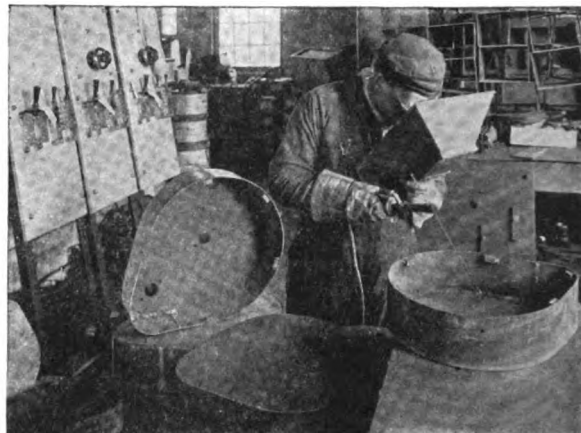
Welding steel sheets together to form gear cases. The lugs on the inside of the case are also welded on. Jobs similar to this can be found in hundreds of manufacturing plants.
